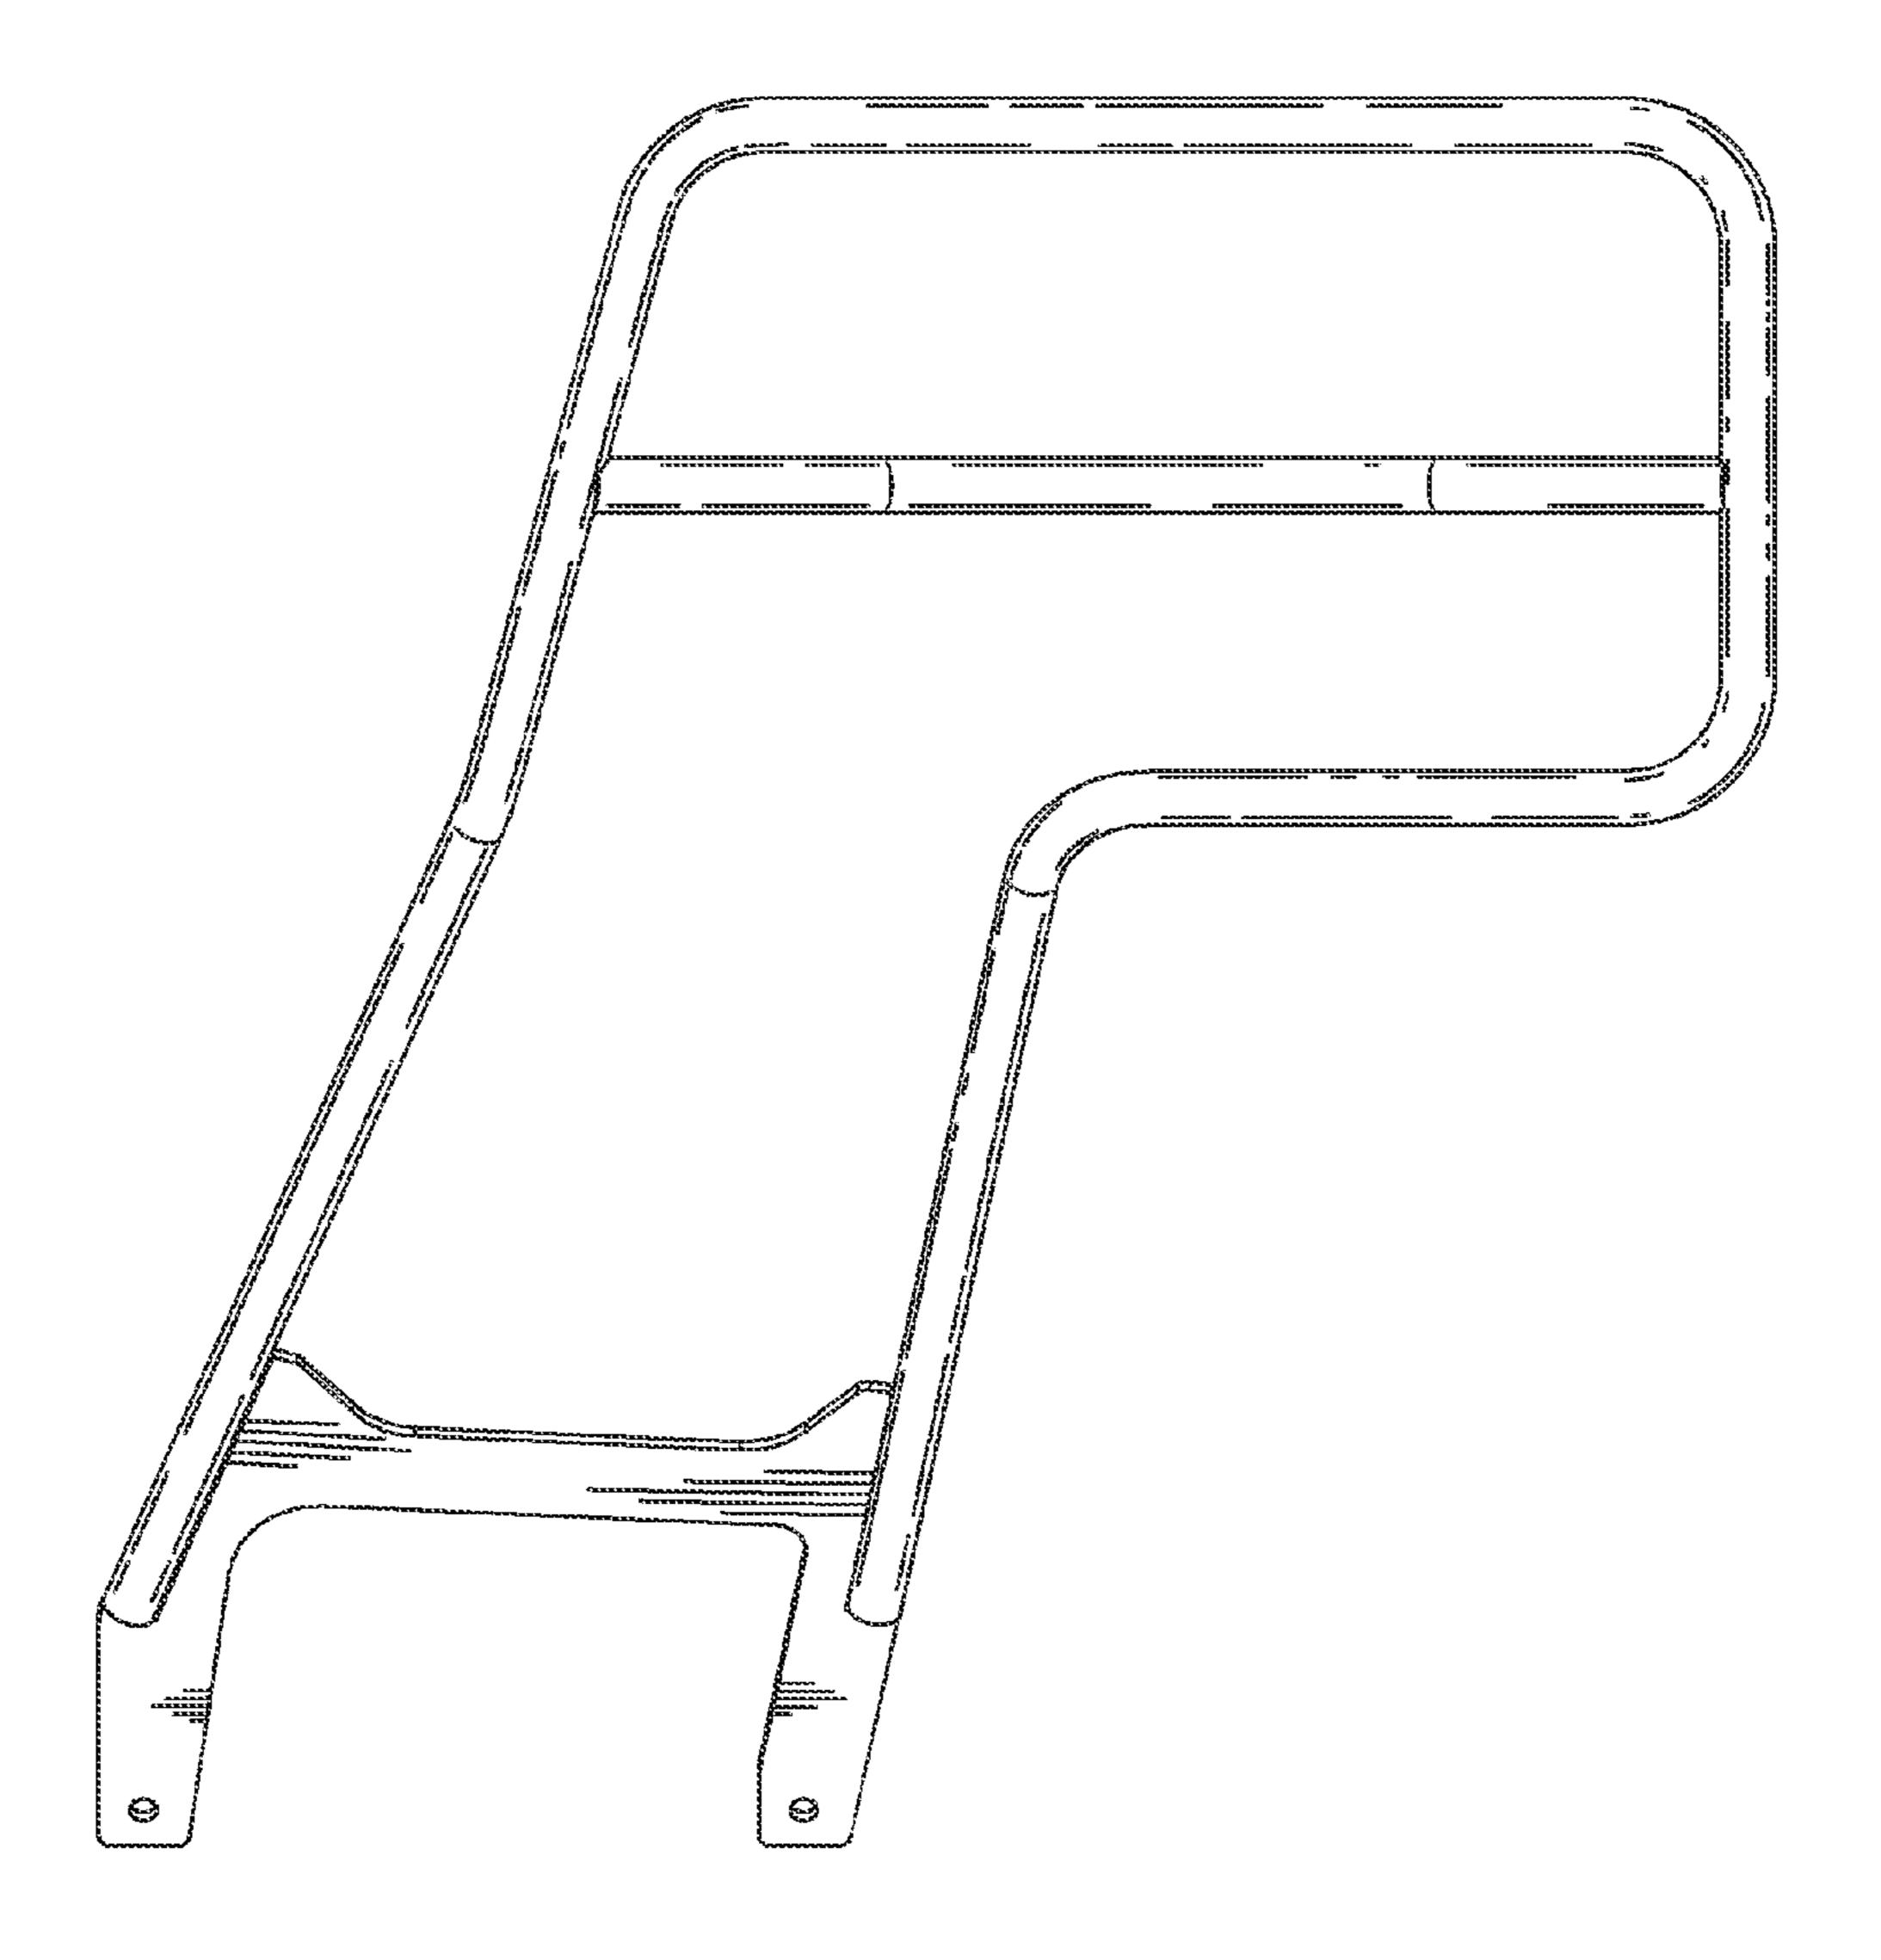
is a perspective view of the design for an extension arm for a road construction machine of FIG. 1; and,
